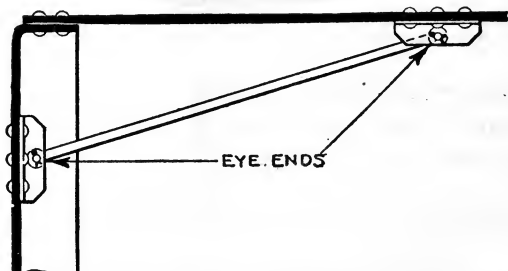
,926.—Diagonal stay with eye ends. It is attached to the boiler angle irons and pins.
